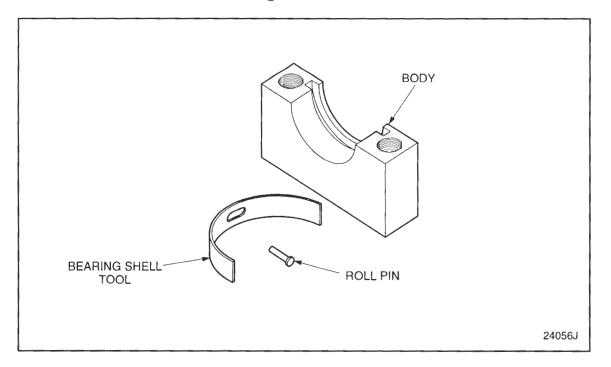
Main Bearing Shell Remover and Installer Tool Set
